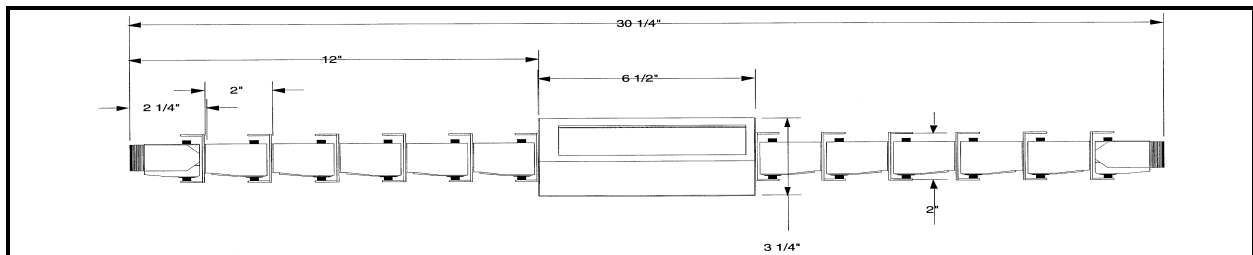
Details of the Kaa mechanical system, a front view, with dimensions in inches.
